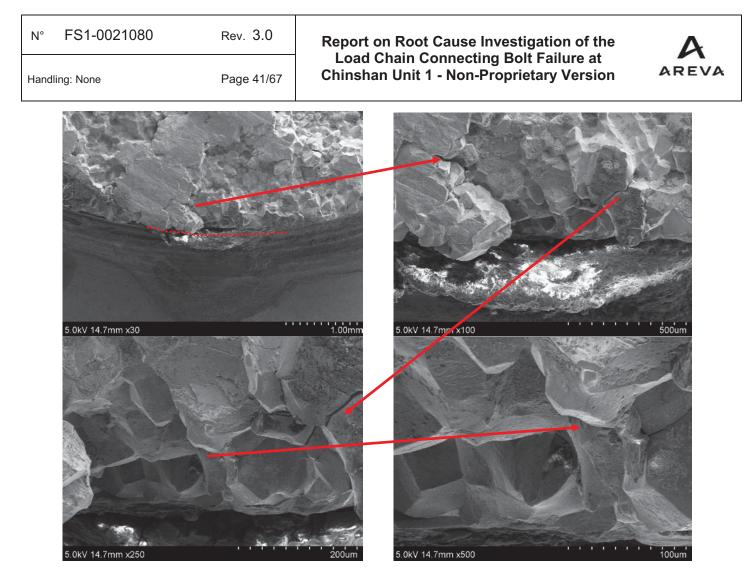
FF1, Specimen II, 180° Position shows intergranular cracking.
